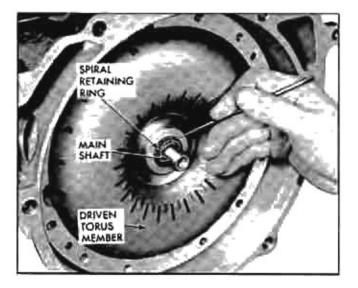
Installing Spiral Retaining Ring on Main Shaft
